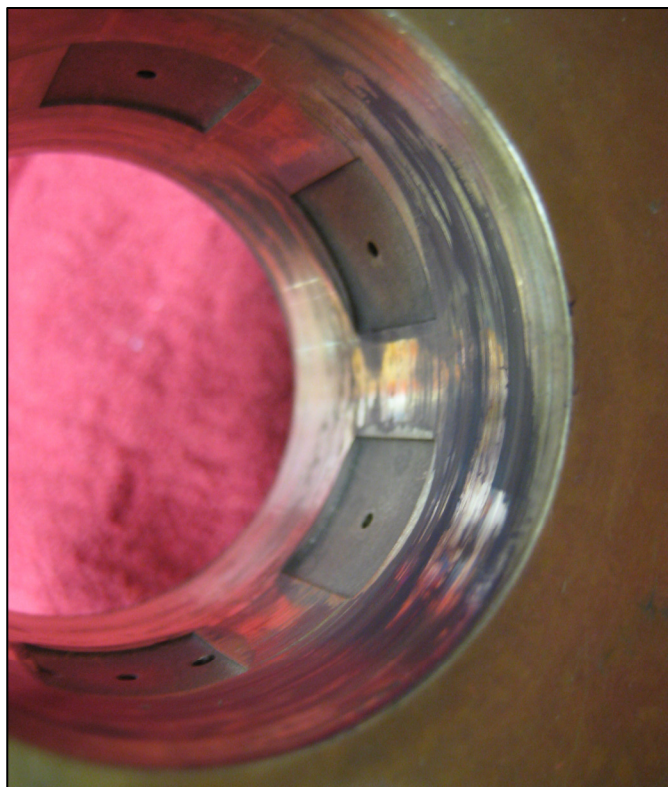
Burnishing of the bearing with applied unit load LOL direction
